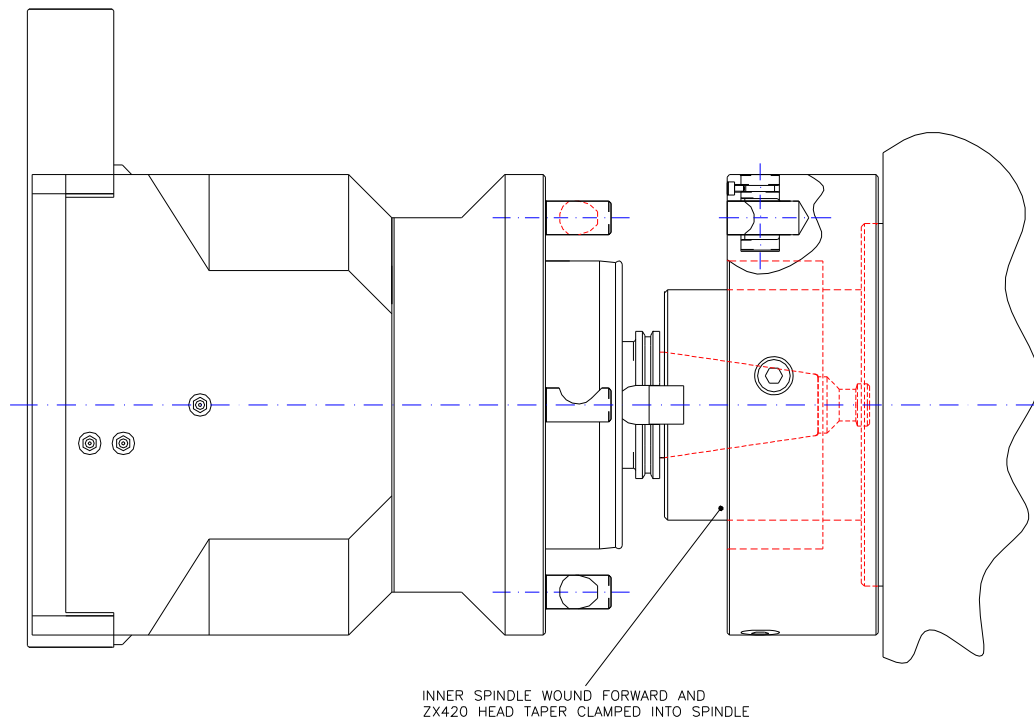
Locating and clamping the ZX420 head into the inner spindle
